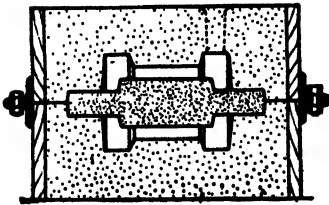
Completed Mold for Hollow Cylinder Casting.
